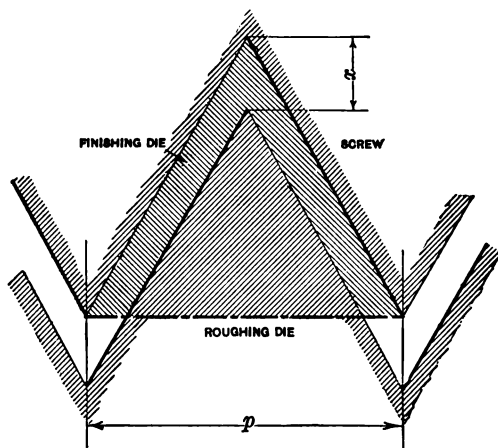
Diagram of Metal Removed, Standard Sharp V Thread
